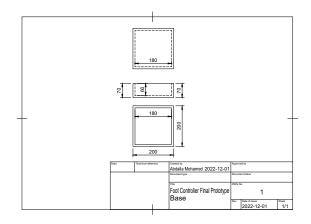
Foot Controller Final Prototype Base Technical Drawing
